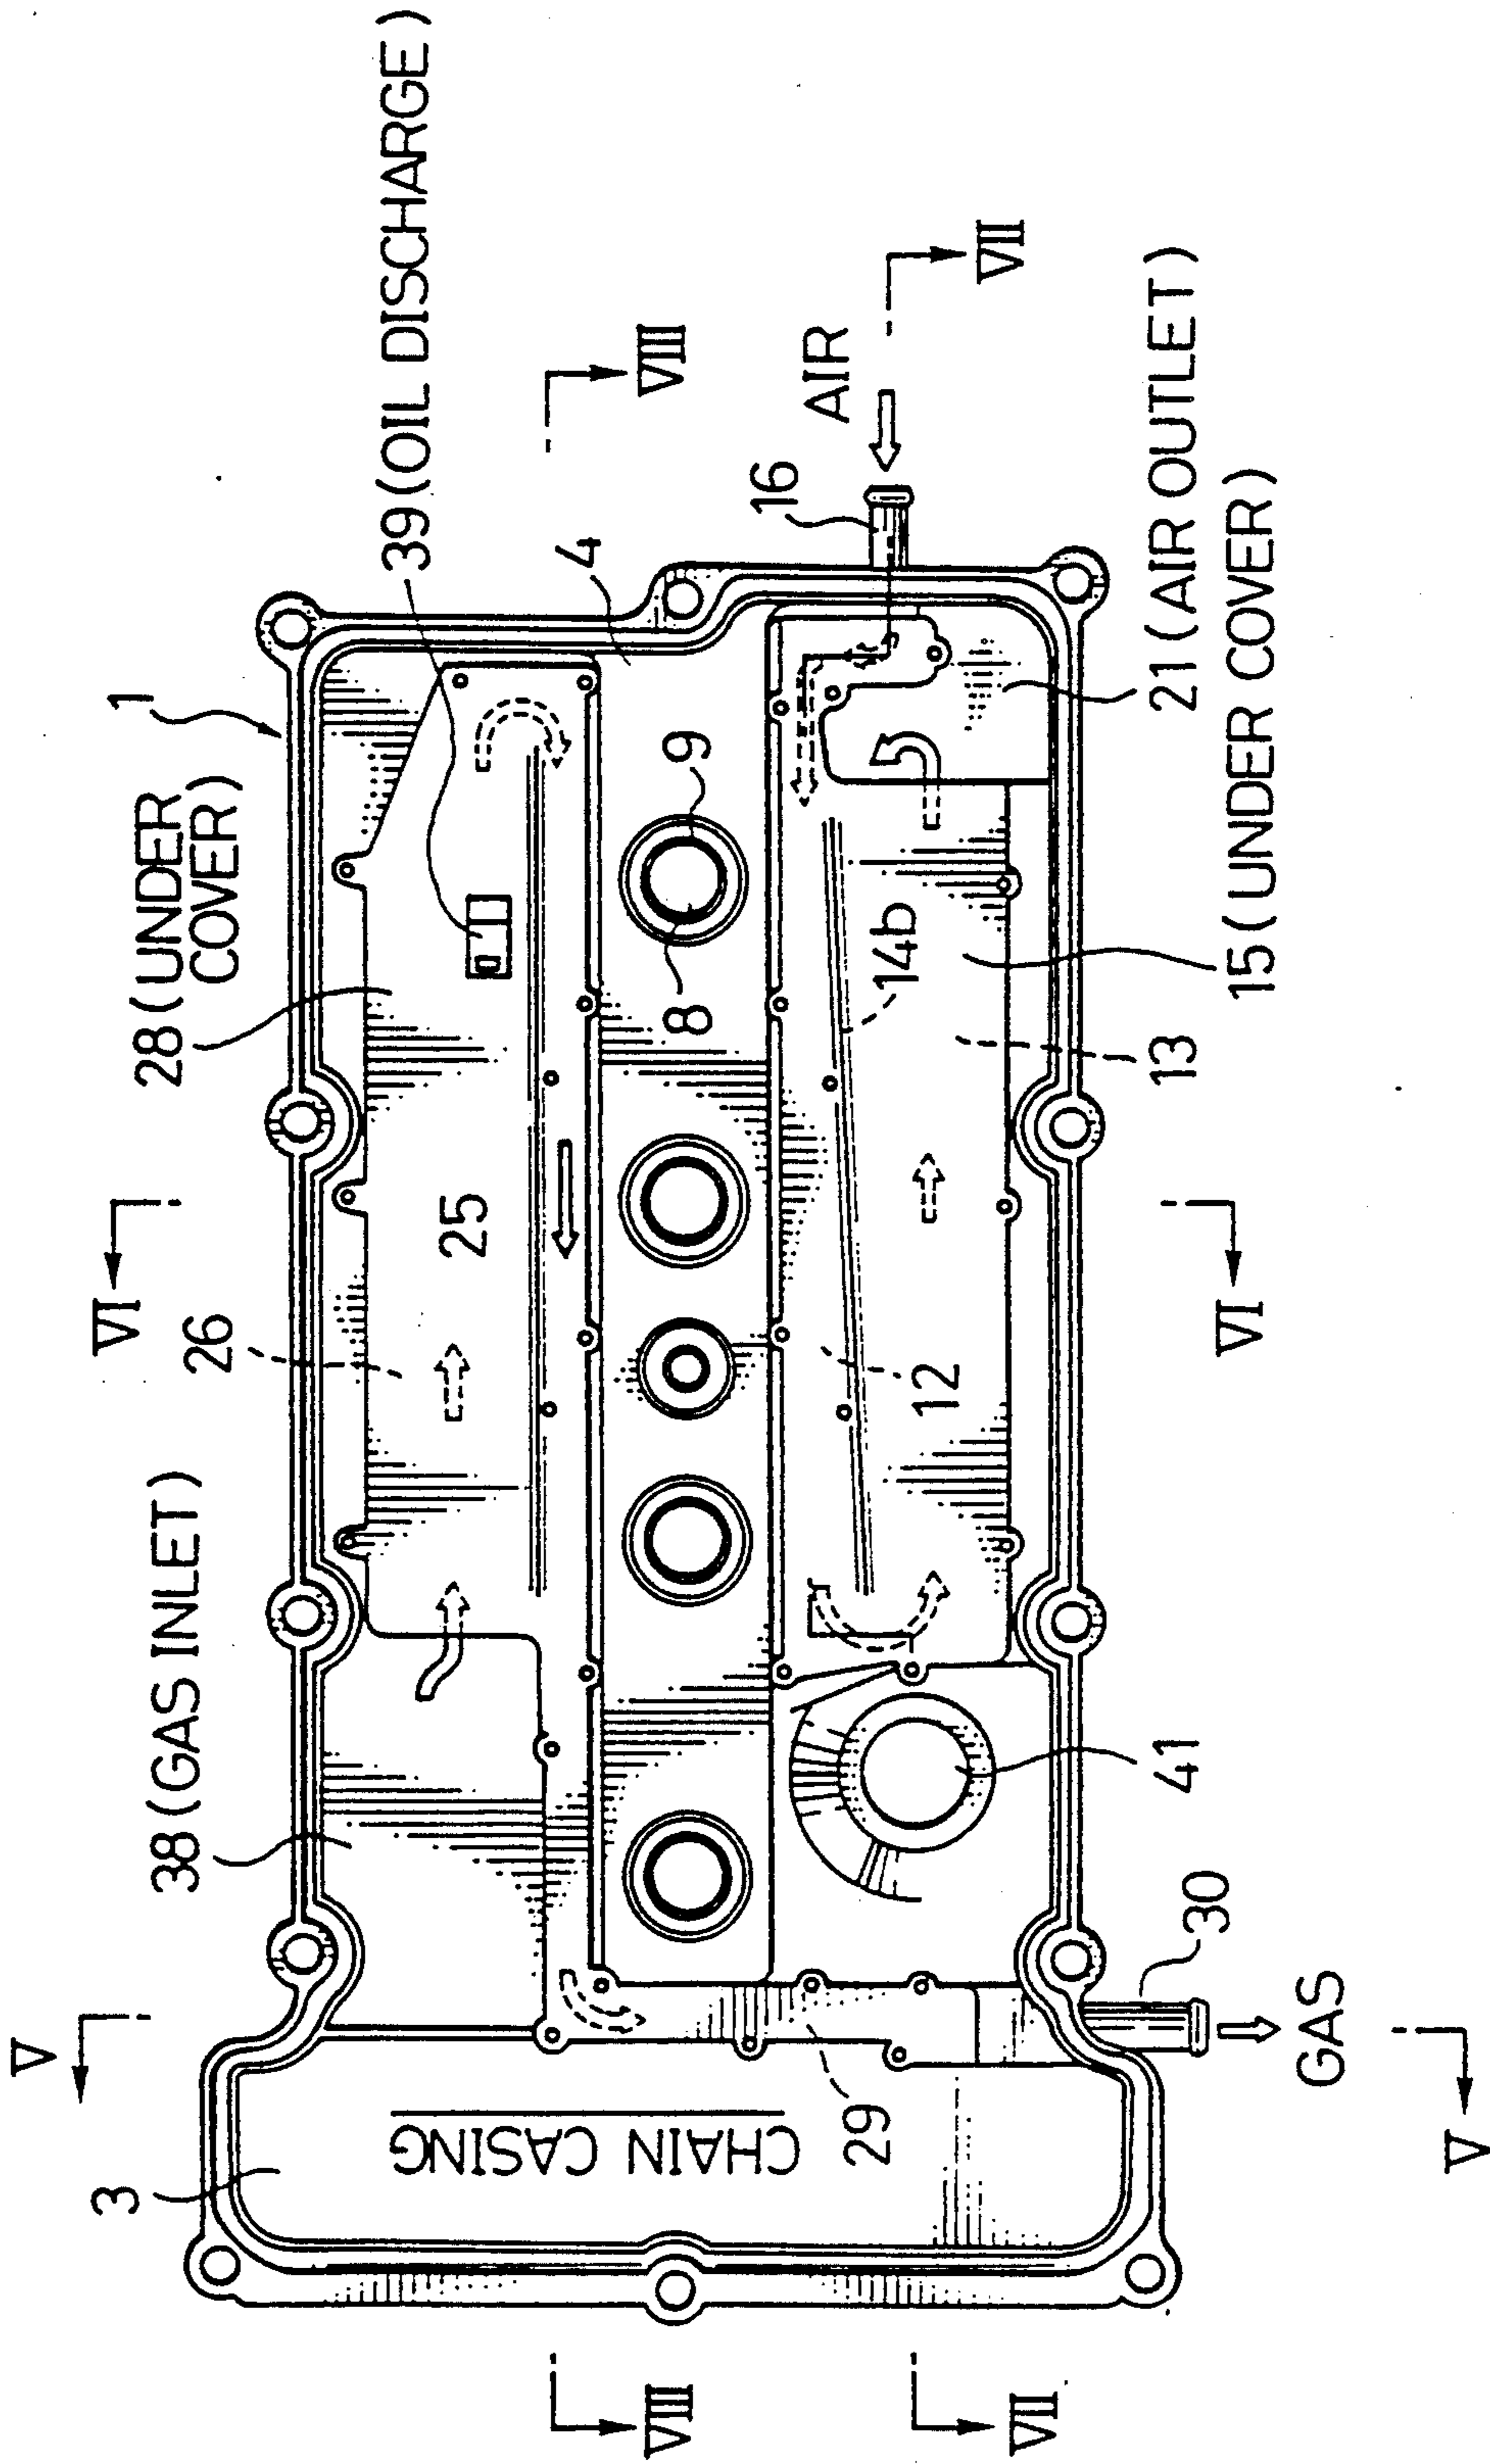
(BOTTOM VIEW WITHOUT UNDER COVER)
